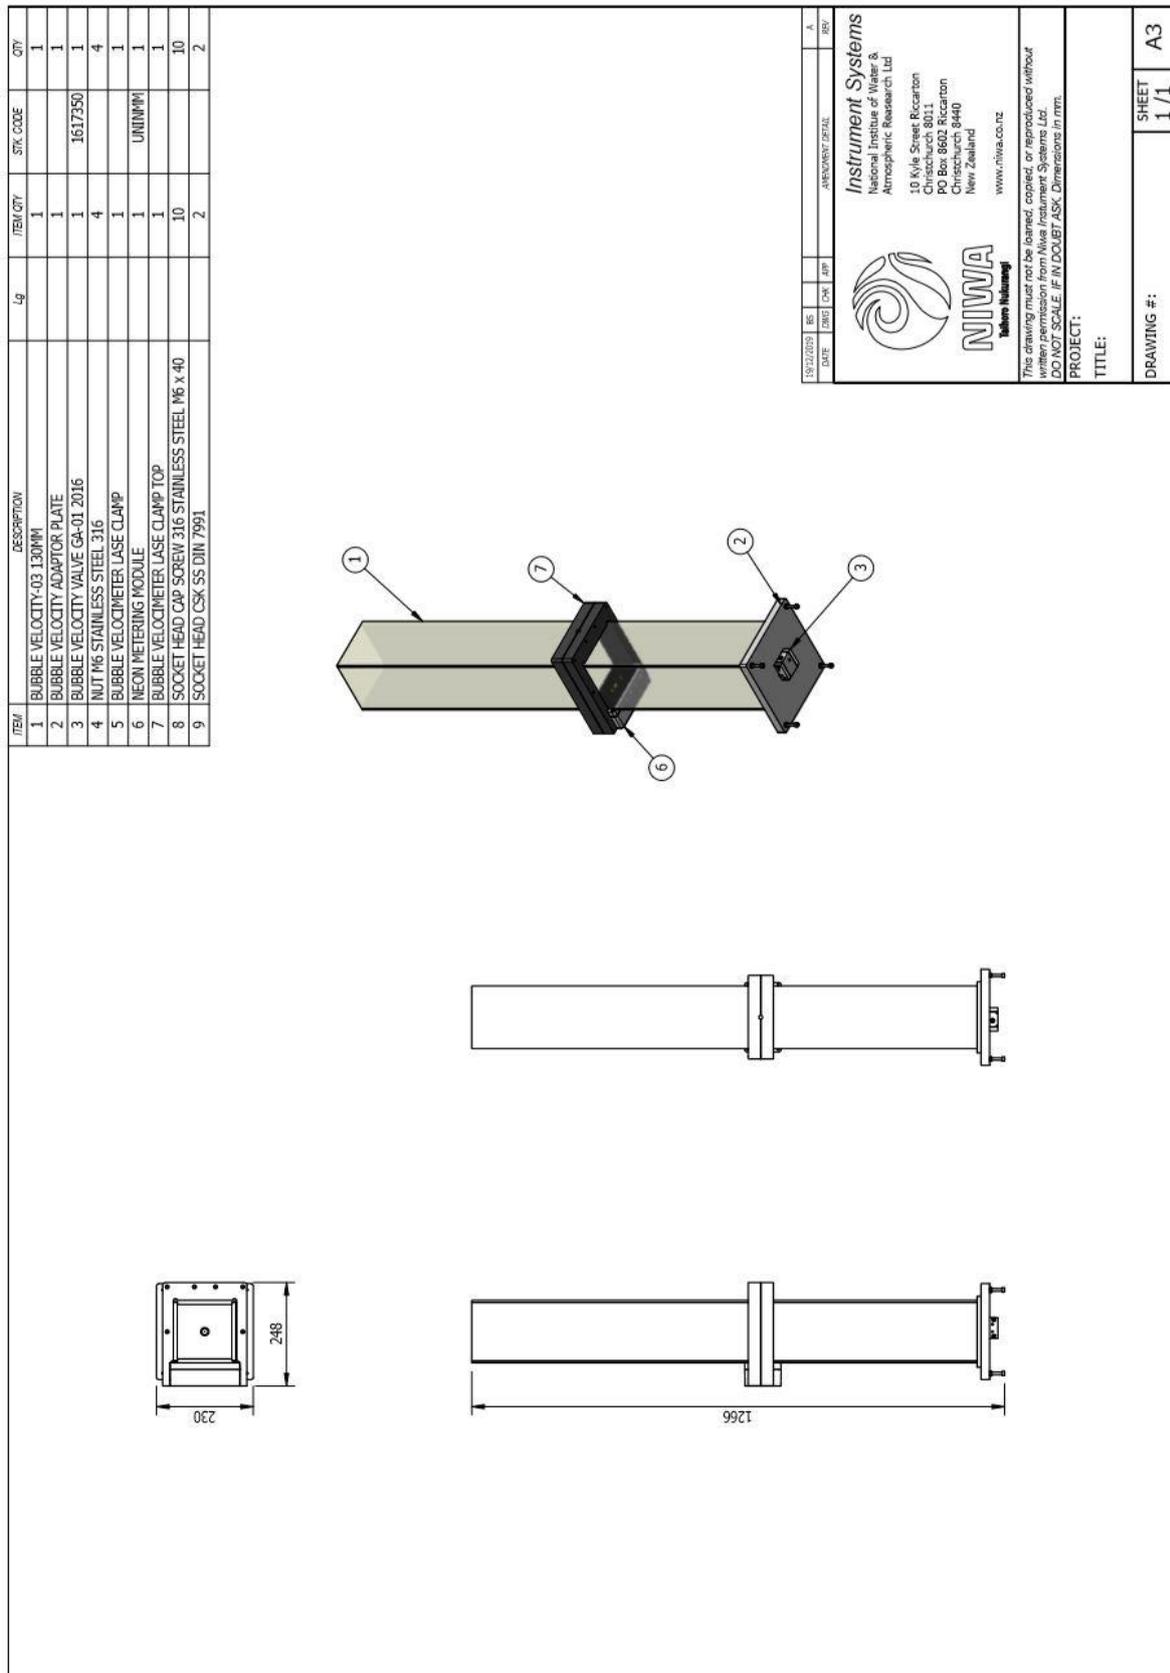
Velocimeter manufacture. The inside dimension of the column is 130 mm
